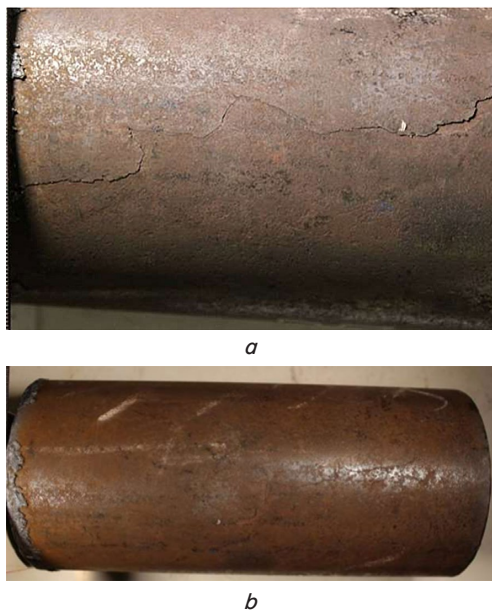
View of the outer surface of the pipe fragment: marking Rp618: *a* – crack on the workpiece; *b* – oxide spot on the workpiece
